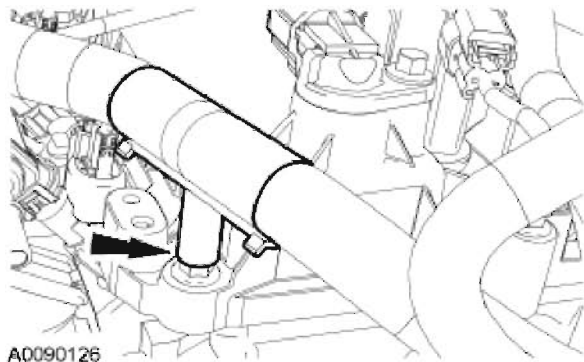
Locating Bolts & Fuel Rail With Fuel Injectors
